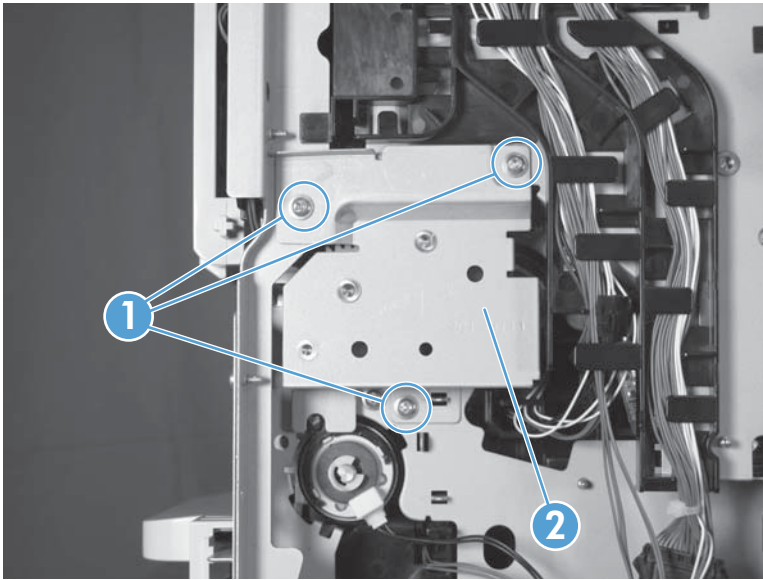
Remove the upper cassette pickup assembly (2 of 2)
